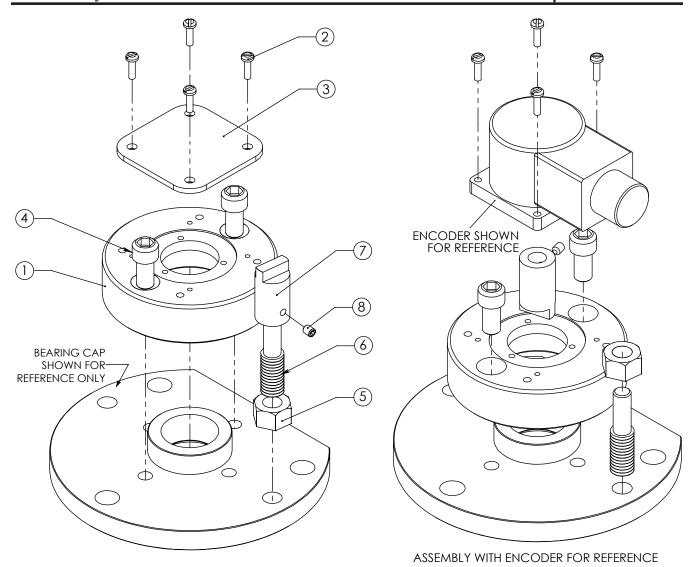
Shaft-Drive Turn Counter Encoder Mount (Type 1, Assembly 55142)
